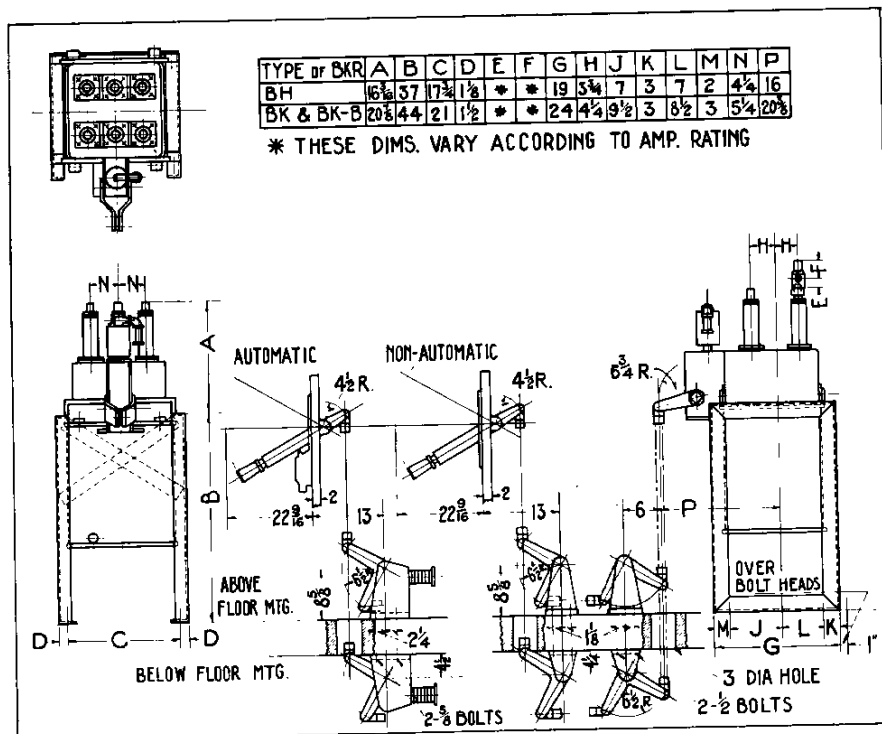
Types BH, BK and BK-B Oil Circuit Breakers, Frame Mounted, Hand Operated, Remote Control. General Dimensions.
